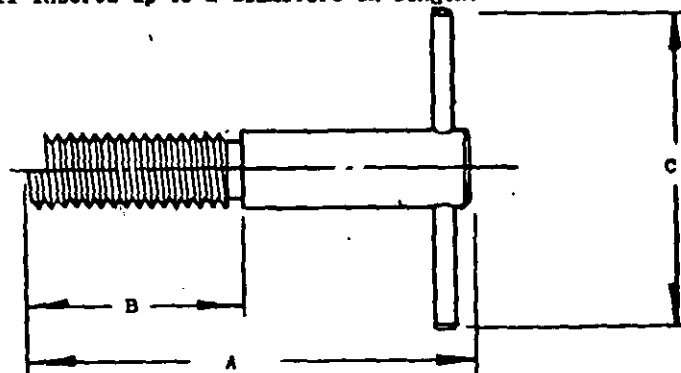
Type III, class 2, style B Mandrel inserting tool for 9/16(.5625) and larger Unified Coarse threads.
